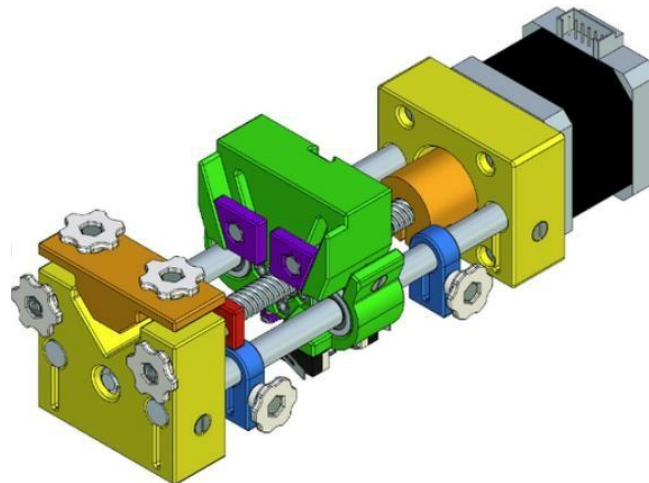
mechanical setup with 3D printed parts with NEMA 17 stepper motor, spring coupler, lead screw and two optical switches.
